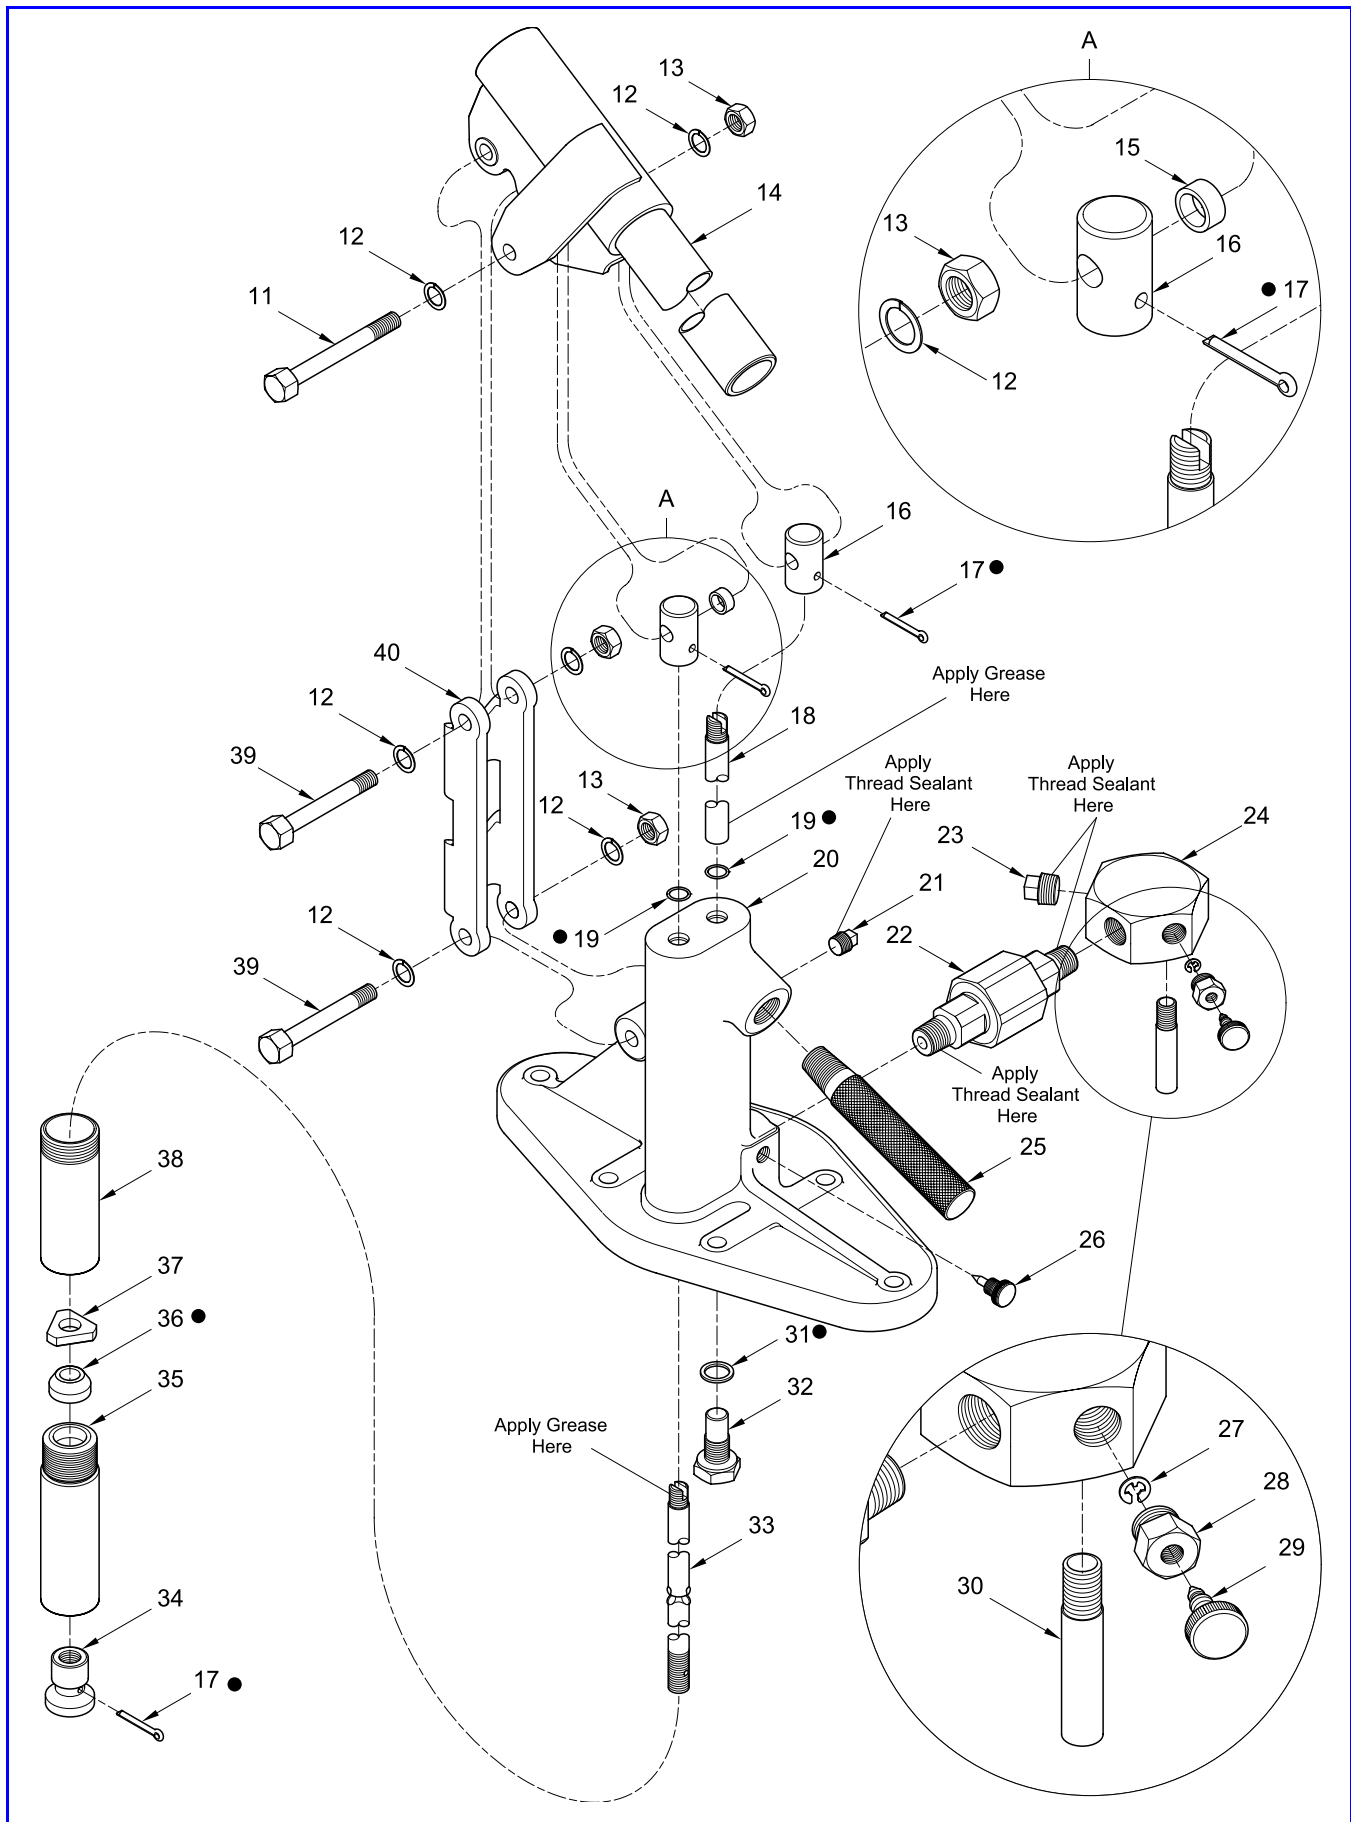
B Pump Assembly Model 310750-4 - Exploded View
